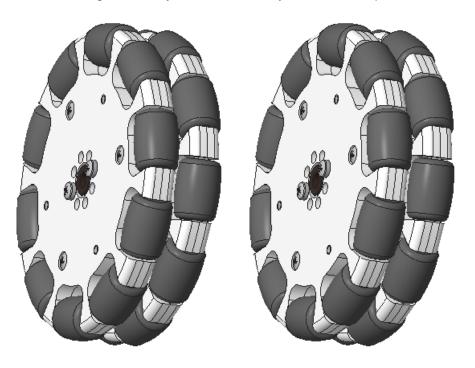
The above image shows only one wheel assembly. Perform this step on both assemblies.
